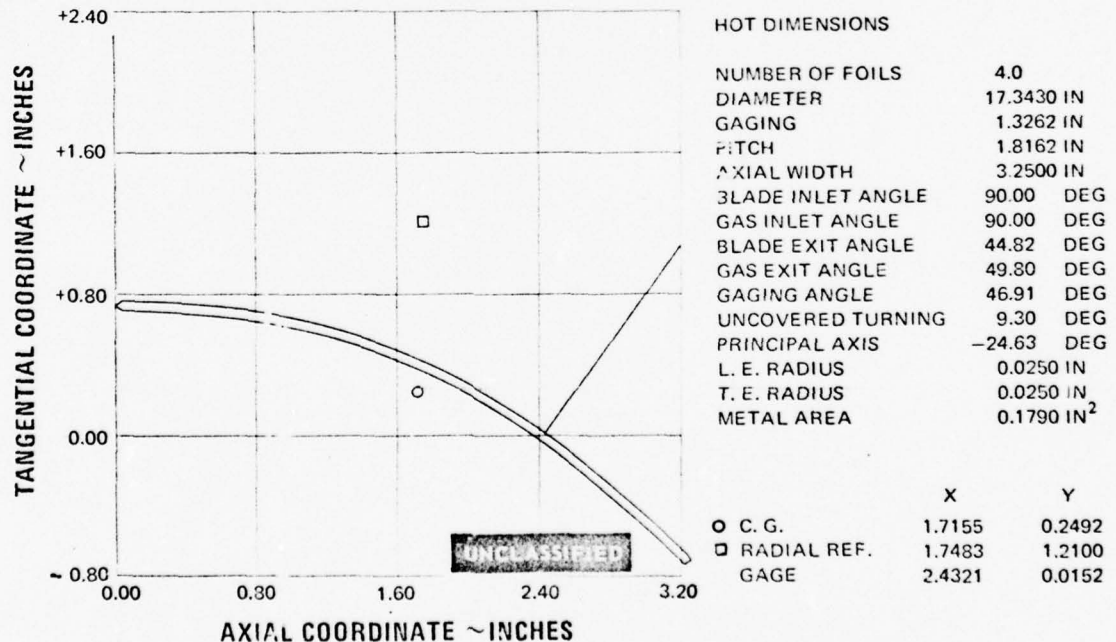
Redesigned Inlet Guide Vane, Second Vane Cascade, 3/8 Root Section
